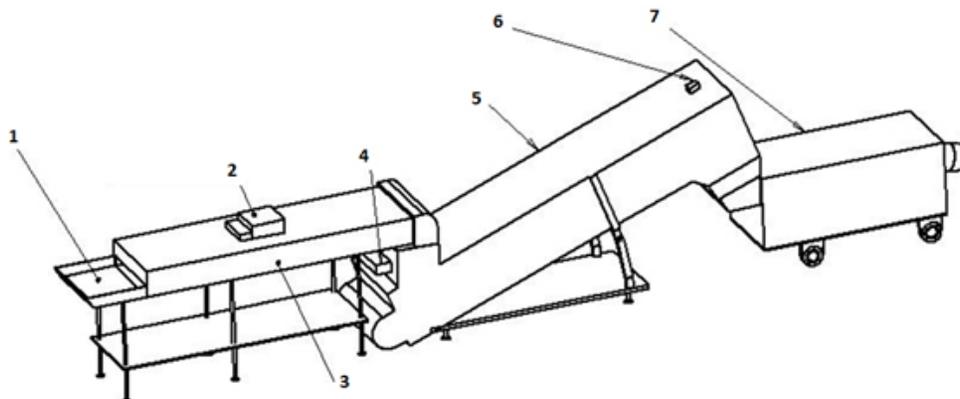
Grape rapid cooling machine: (1) grape inlet hopper; (2) CO₂ injector; (3) vibrating table; (4) CO₂ injector; (5) belt elevator; (6) temperature drill; (7) crusher-destemmer machine.
